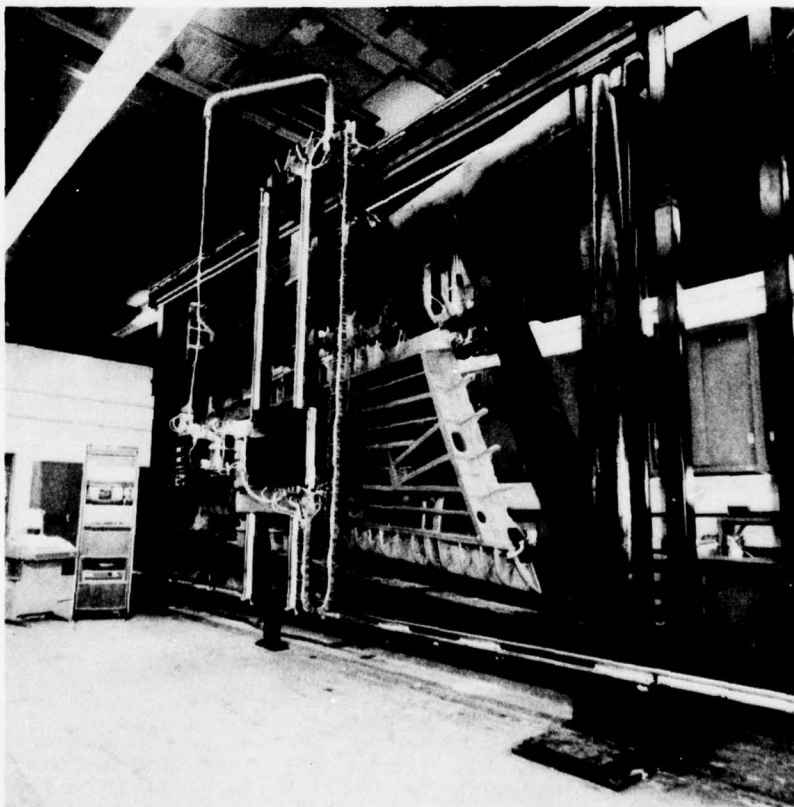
Grumman Five-Axis Automated Assembly Fixture
